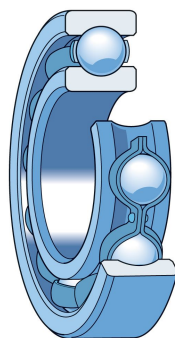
Rolling Element Bearing. The balls fit well into the deep grooves, enabling the bearing to support axial loads in both directions, in addition to radial loads. The bearing illustrated here has a single row of balls [1].
